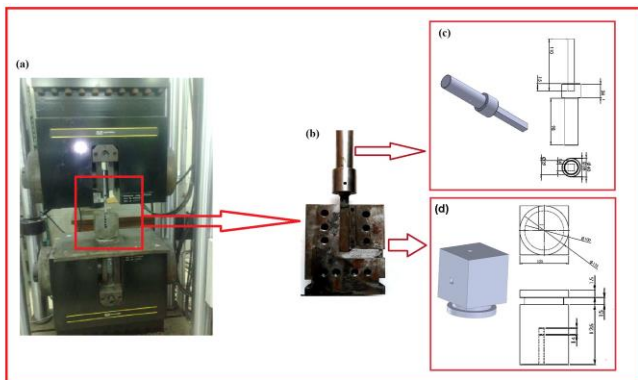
ECAP process (a) An Instron machine, (b) The die and the processed sample at the conclusion of the ECAP process, (c) plunger's dimensions, mounted on the Instron machine, and (d) the die's dimensions, also mounted on the Instron machine.
